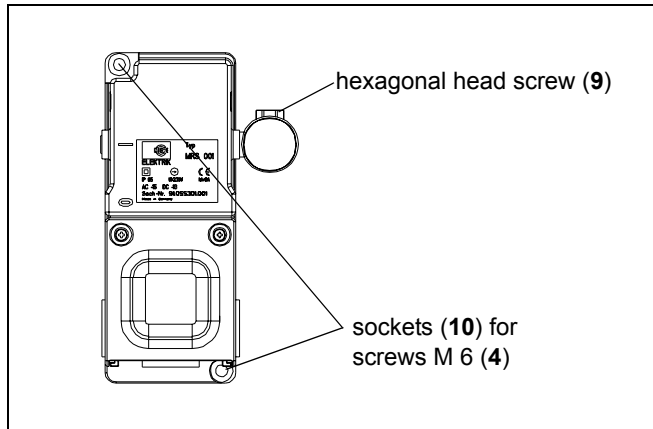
Mounting the misalignment switches on the belt conveyor
